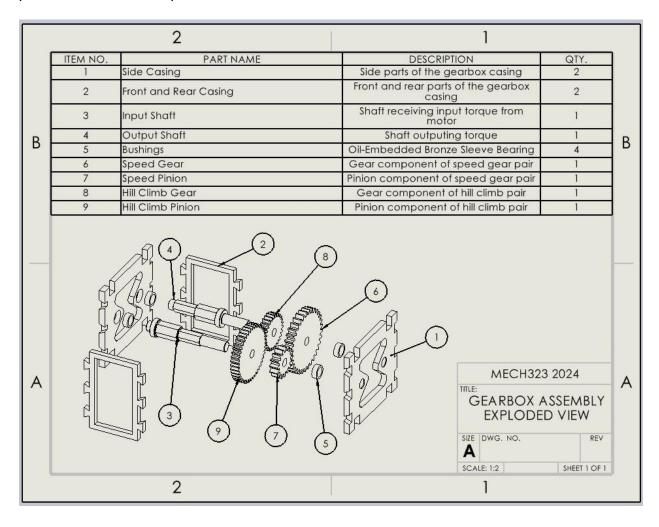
CAD drawing of the gearbox assembly from an exploded view including bill of materials.
